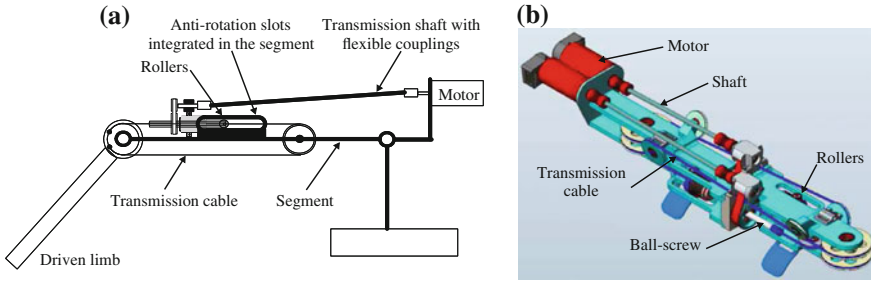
SCS basic principles: a driving unit b and particular patented mounting [32]. Figure courtesy of *CEA-LIST
